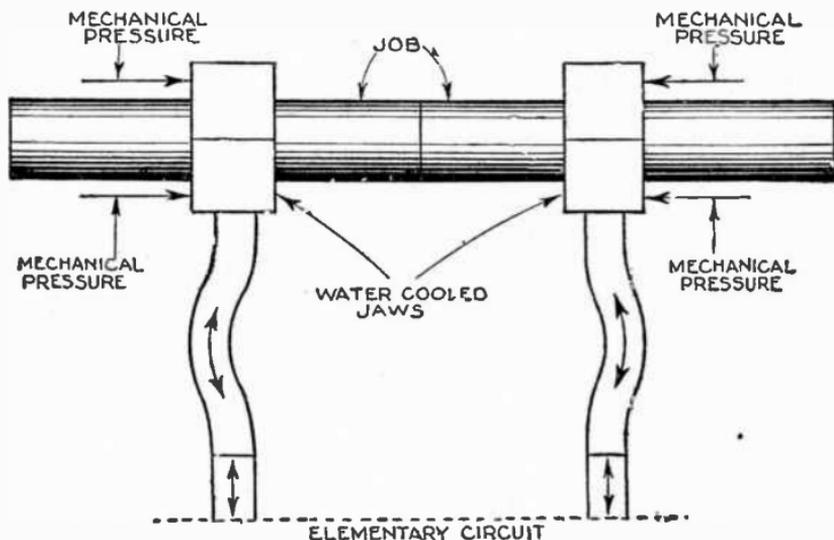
,117.—Circuit diagram for butt welding.
